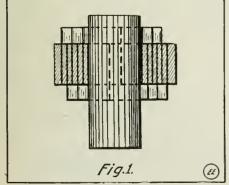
Showing Detail of Moving Spirai Plate Member of Variable Condenser; the Brass Ribbon Spiral Is Held by Molded Lad.
